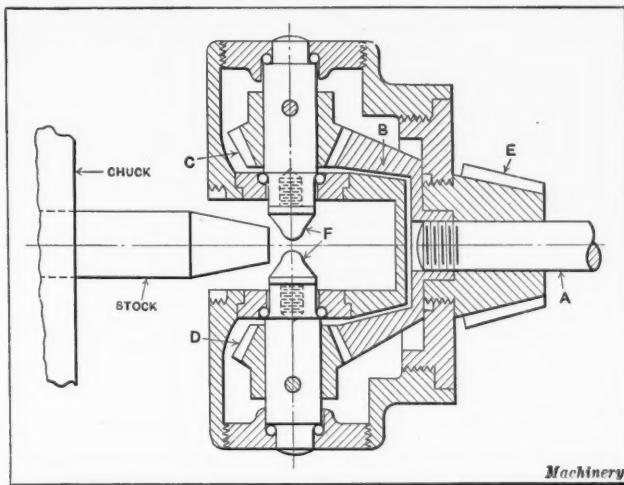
Sectional View of Milling Head showing Method of driving the Grooving Cutters
